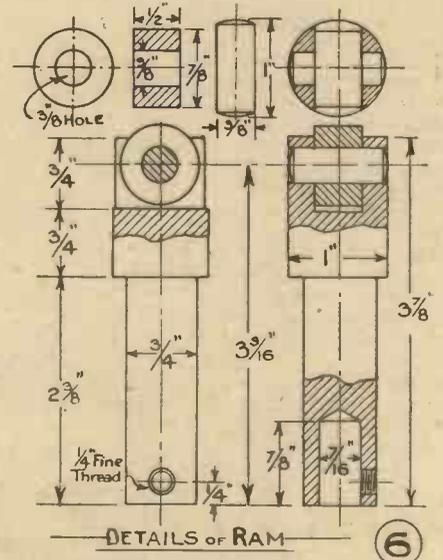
The ram is made of cast steel and should be turned to the dimensions shown.
